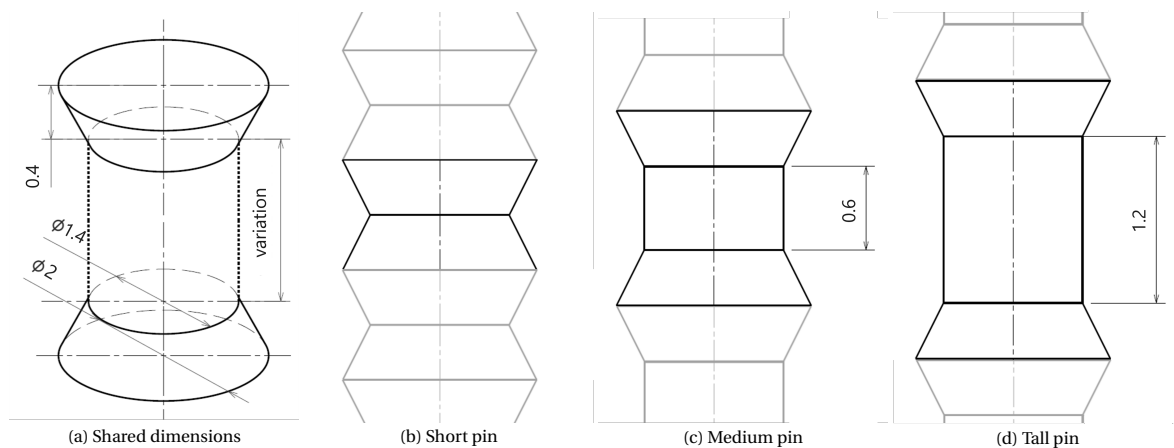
Geometrical definition of the three pin designs. (a) Isometric view showing the shared dimensions across all samples. (b) Short pin with no cylindrical section. (c) Medium pin with a 0.6 mm cylindrical segment. (d) Tall pin with a 1.2 mm cylindrical segment.
